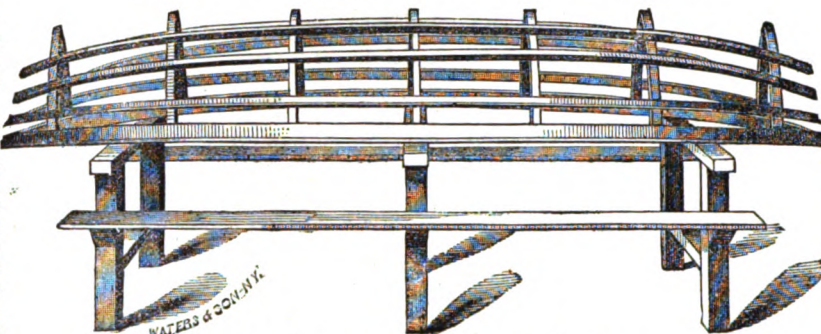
ASSEMBLING FORM, WITHOUT FRAMES.
